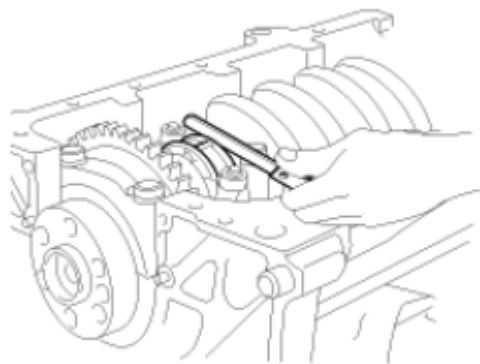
Measuring Connecting Rod End Play Using Feeler Gauge
